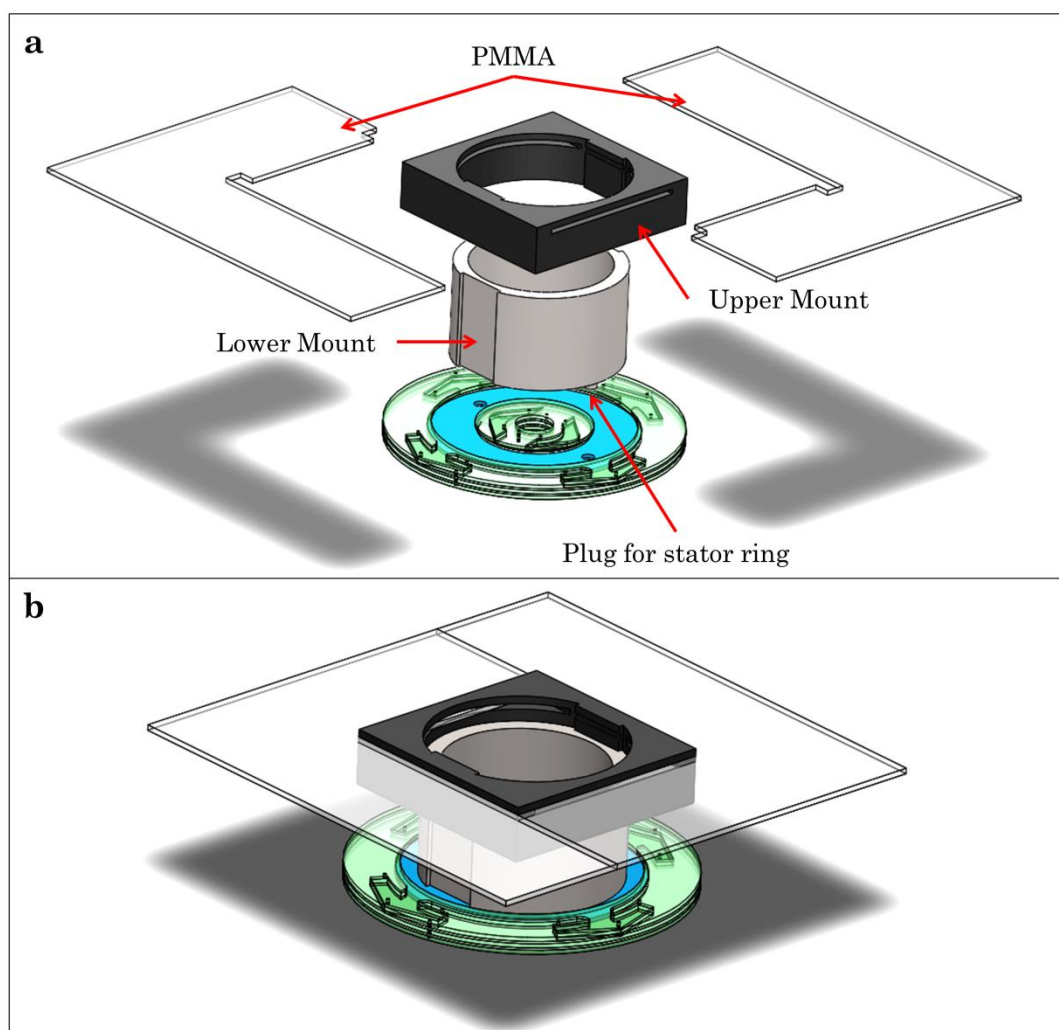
Schematic of stator rotor holder which attached to the spin stand. a) Exploded view of the functional components of the holder. b) Assembled view of the holder.
